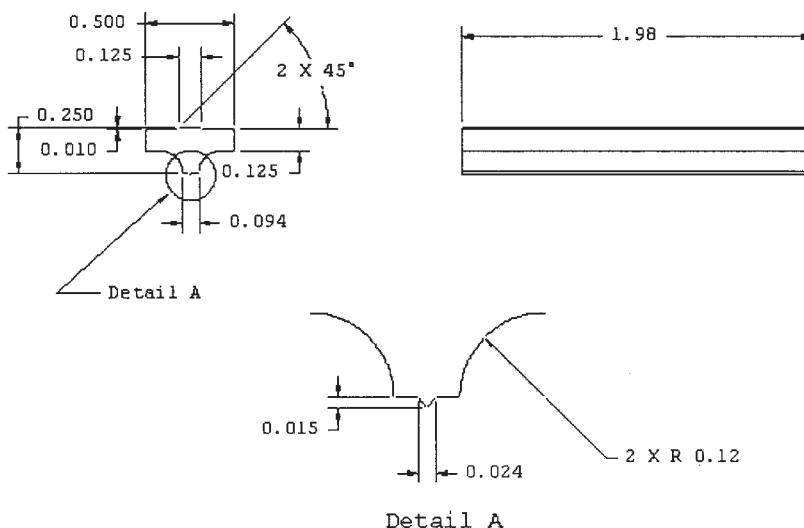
AWS ultrasonic welding specimen 1.
